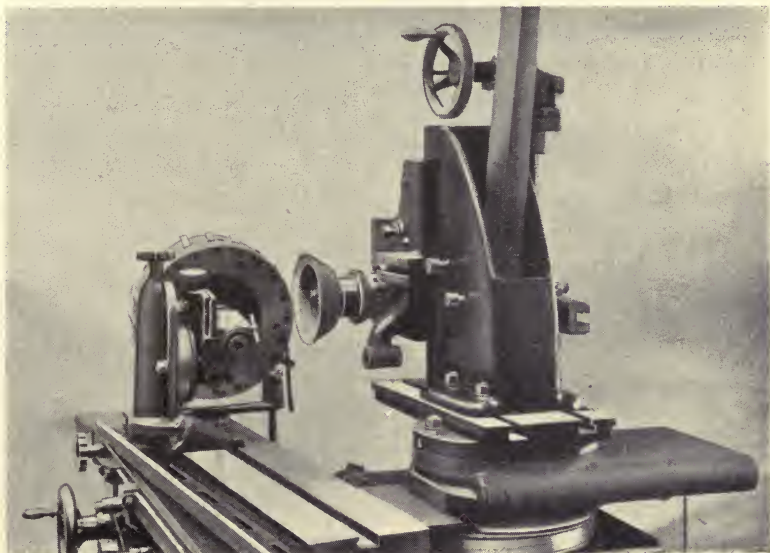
TOOL ROOM UNIVERSAL GRINDER—CHURCHILL
